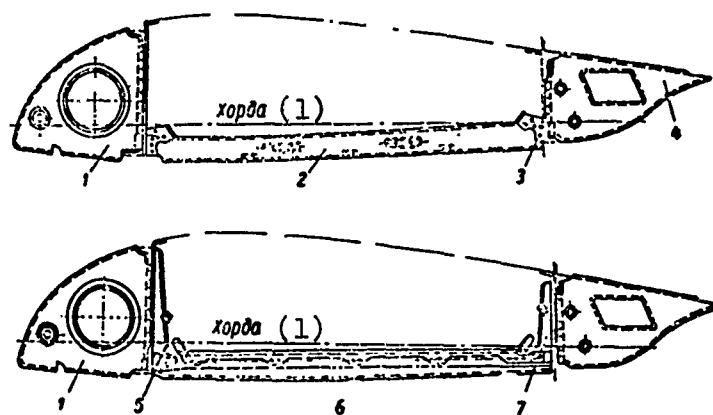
Fuel section ribs: 1 - nose; 2 - seat under fuel tank (bed); 3 - knee; 4 - trailing edge; 5 - front strut; 6 - duralumin tube; 7 - rear strut.
